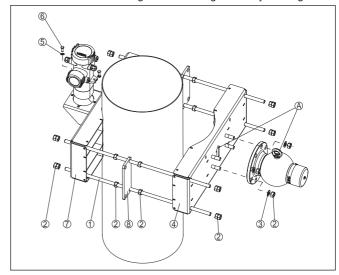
Mounting bracket KV 31 with vertically mounted sensor
